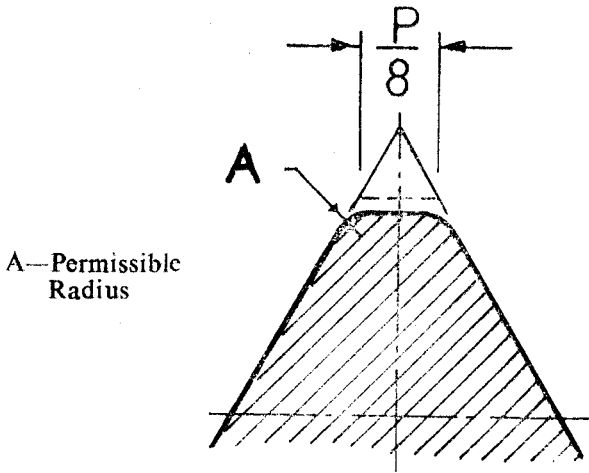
Crest produced by grinding with a crushed multiribbed wheel.
